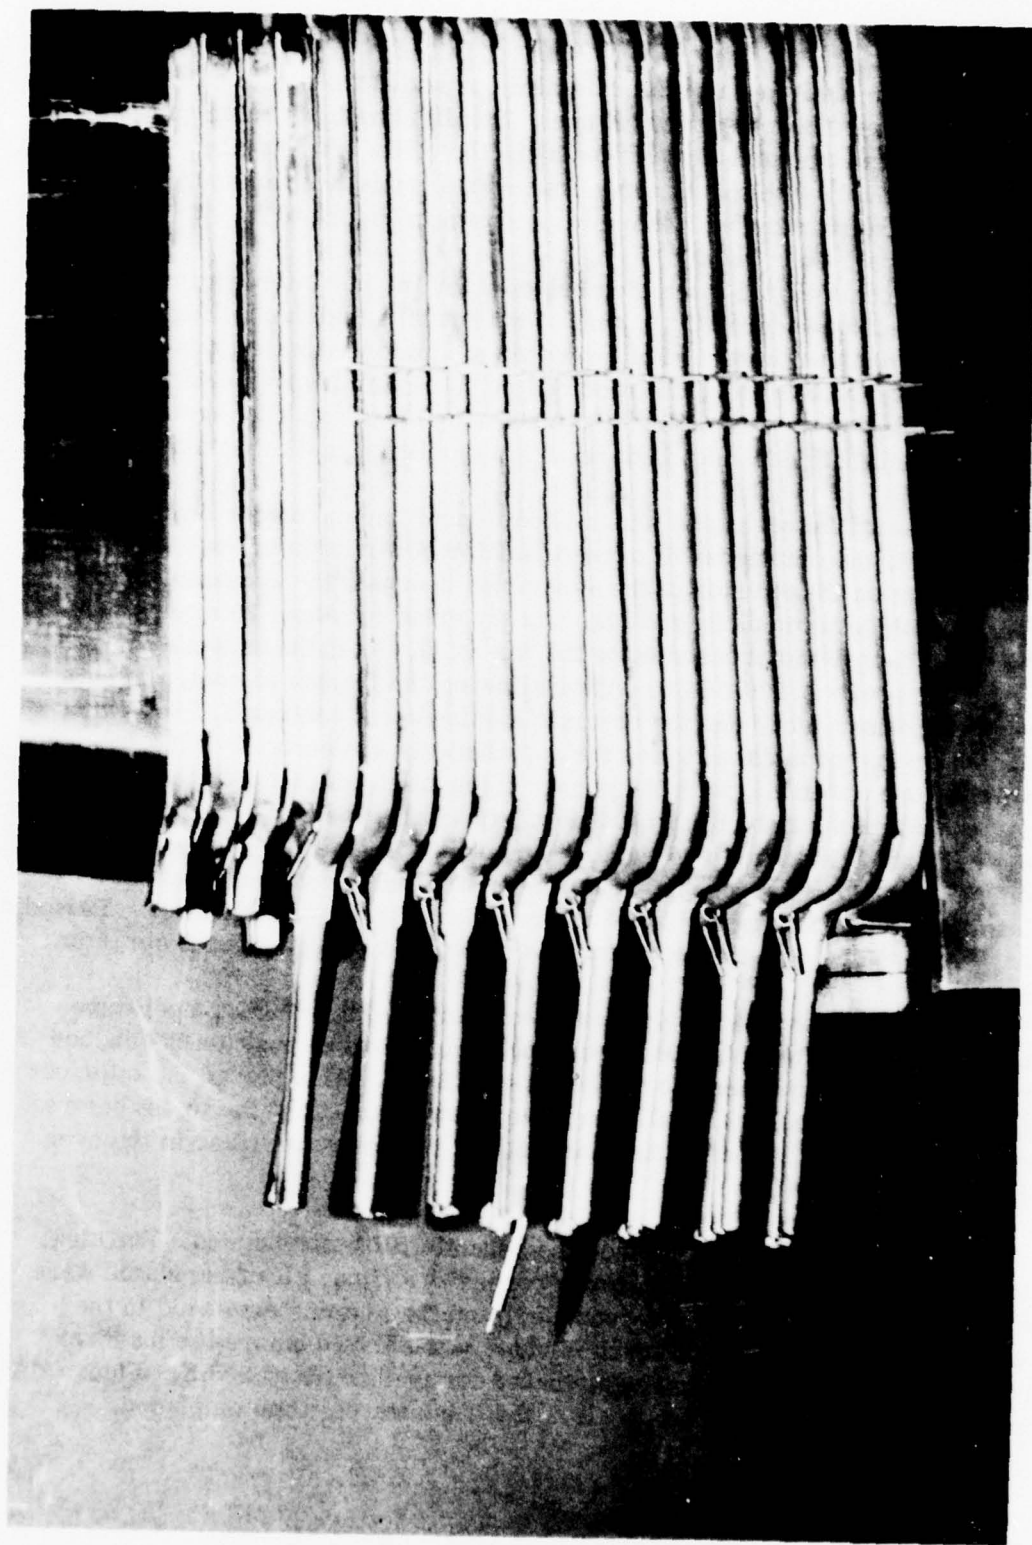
Partial Electrode Frame Assembly on Mandrel.
